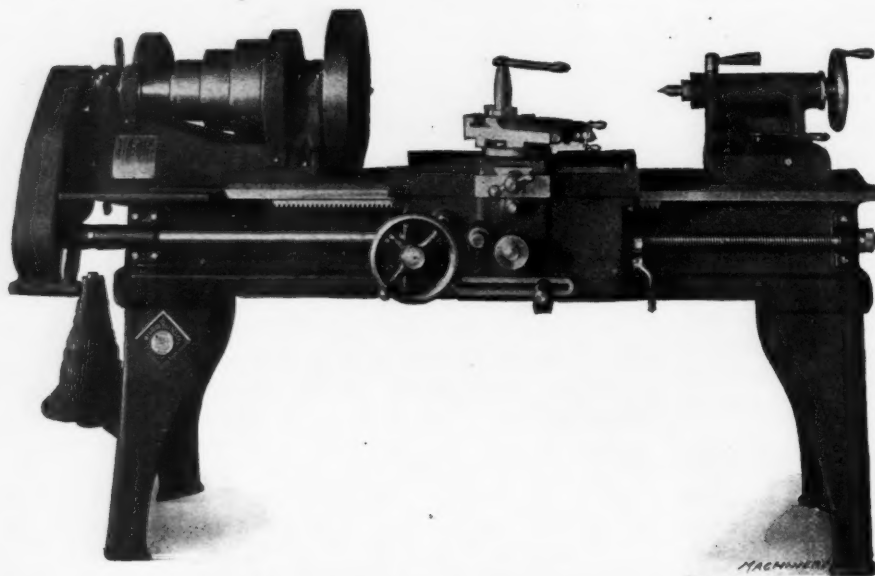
Front View of W. F. & John Barnes Screw-cutting Engine Lathe
